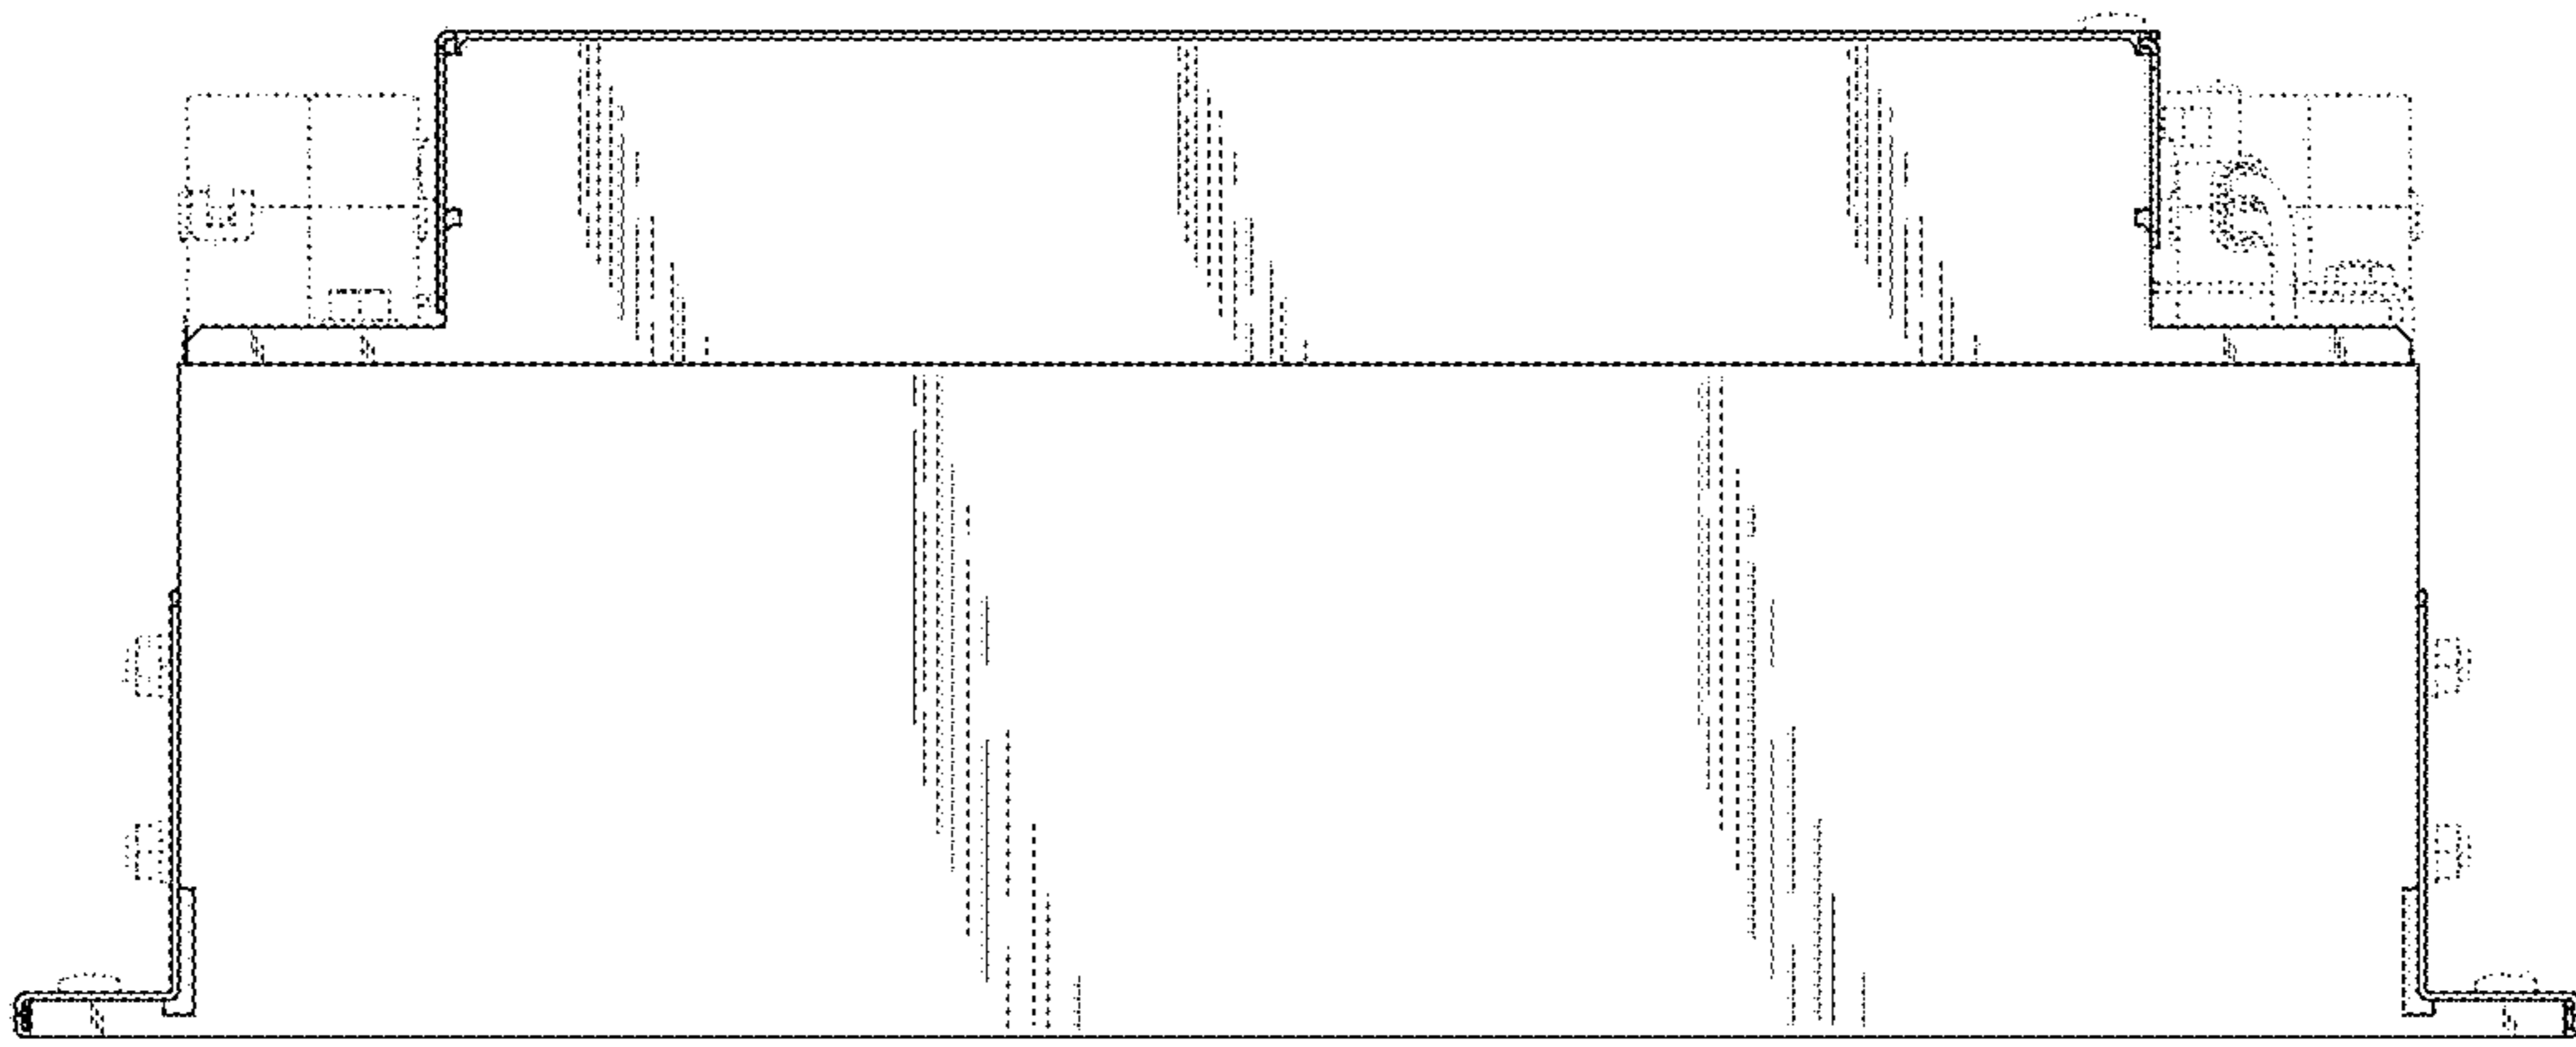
is a front elevation view of an electric power storage module showing our new design;
